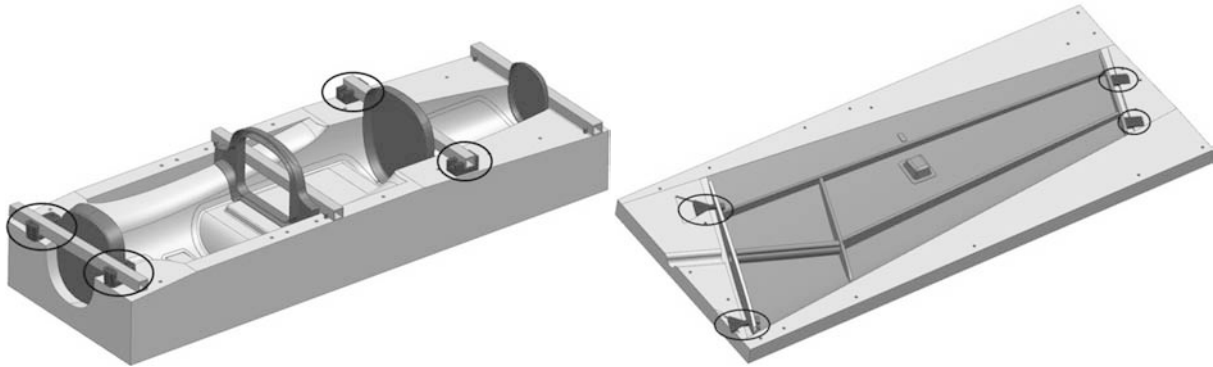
Example of using 3D printed tools for positioning elements of the body and the wing
